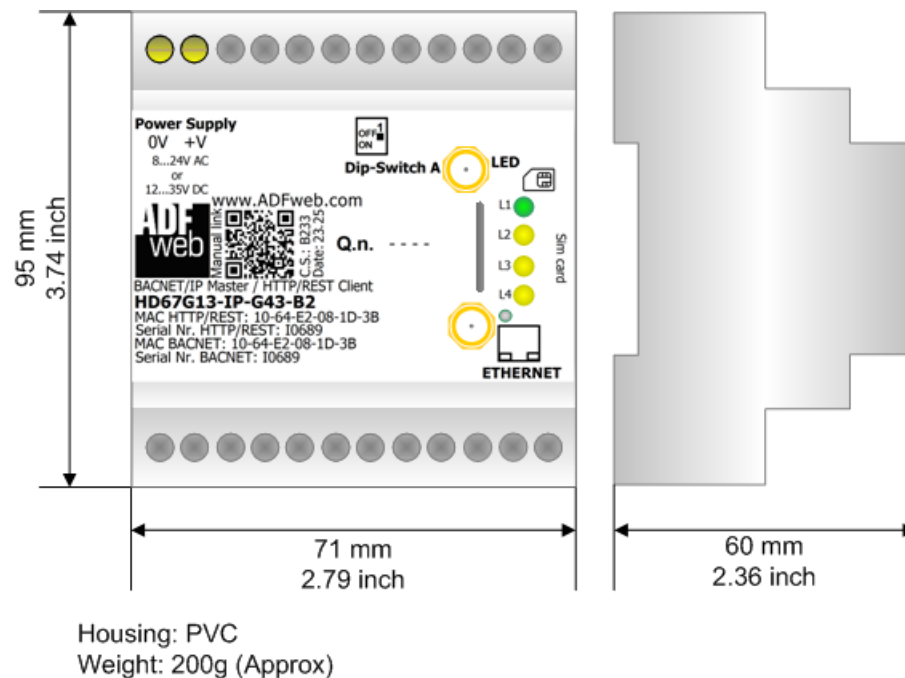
Mechanical dimensions scheme for HD67G13-IP-G43-x-xxx-B2
